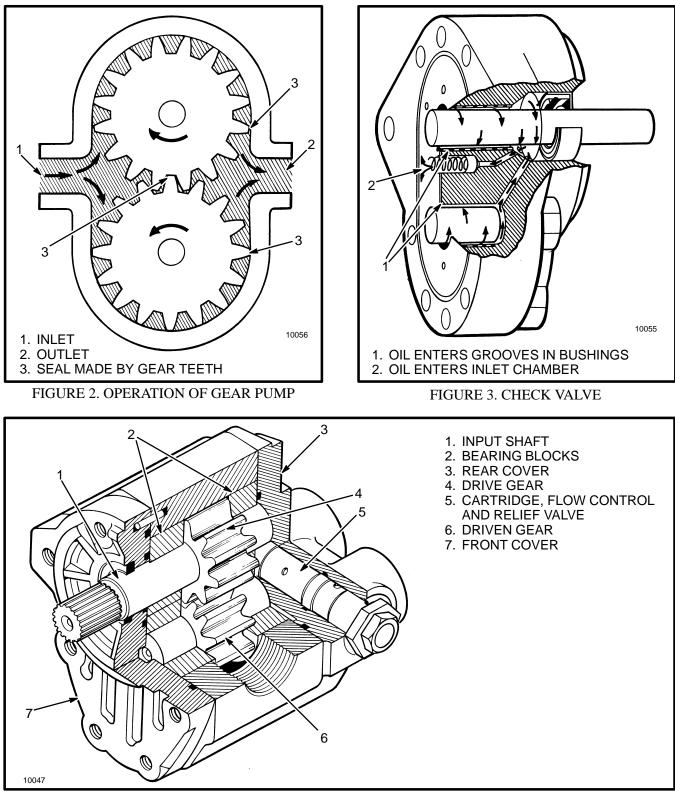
BASIC PARTS OF A GEAR PUMP
